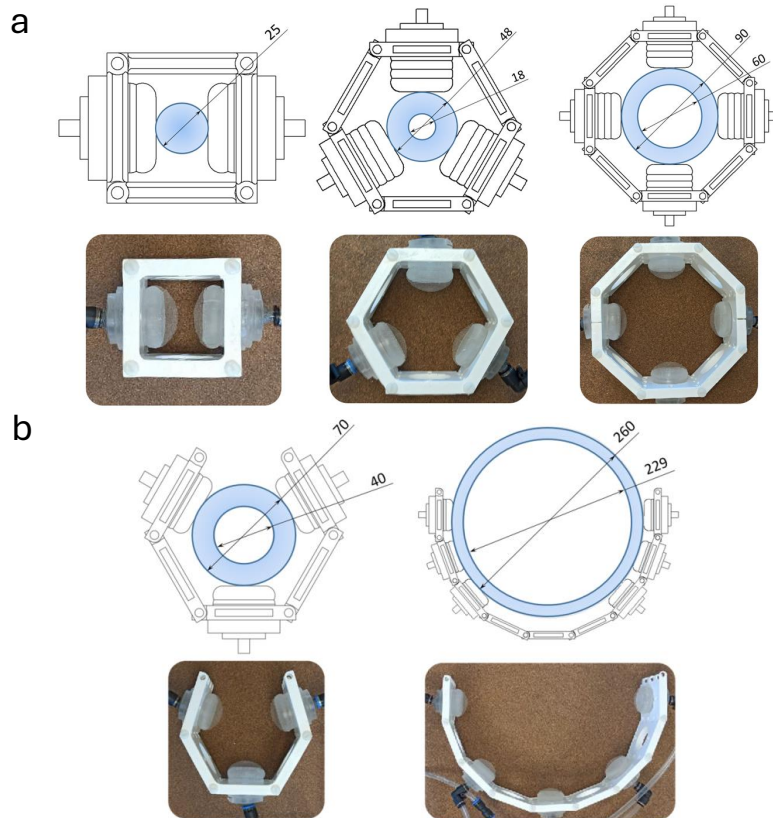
Examples of soft grippers obtained from the proposed design approach. (a) Closed gripper configurations. (b) Open gripper configurations.
